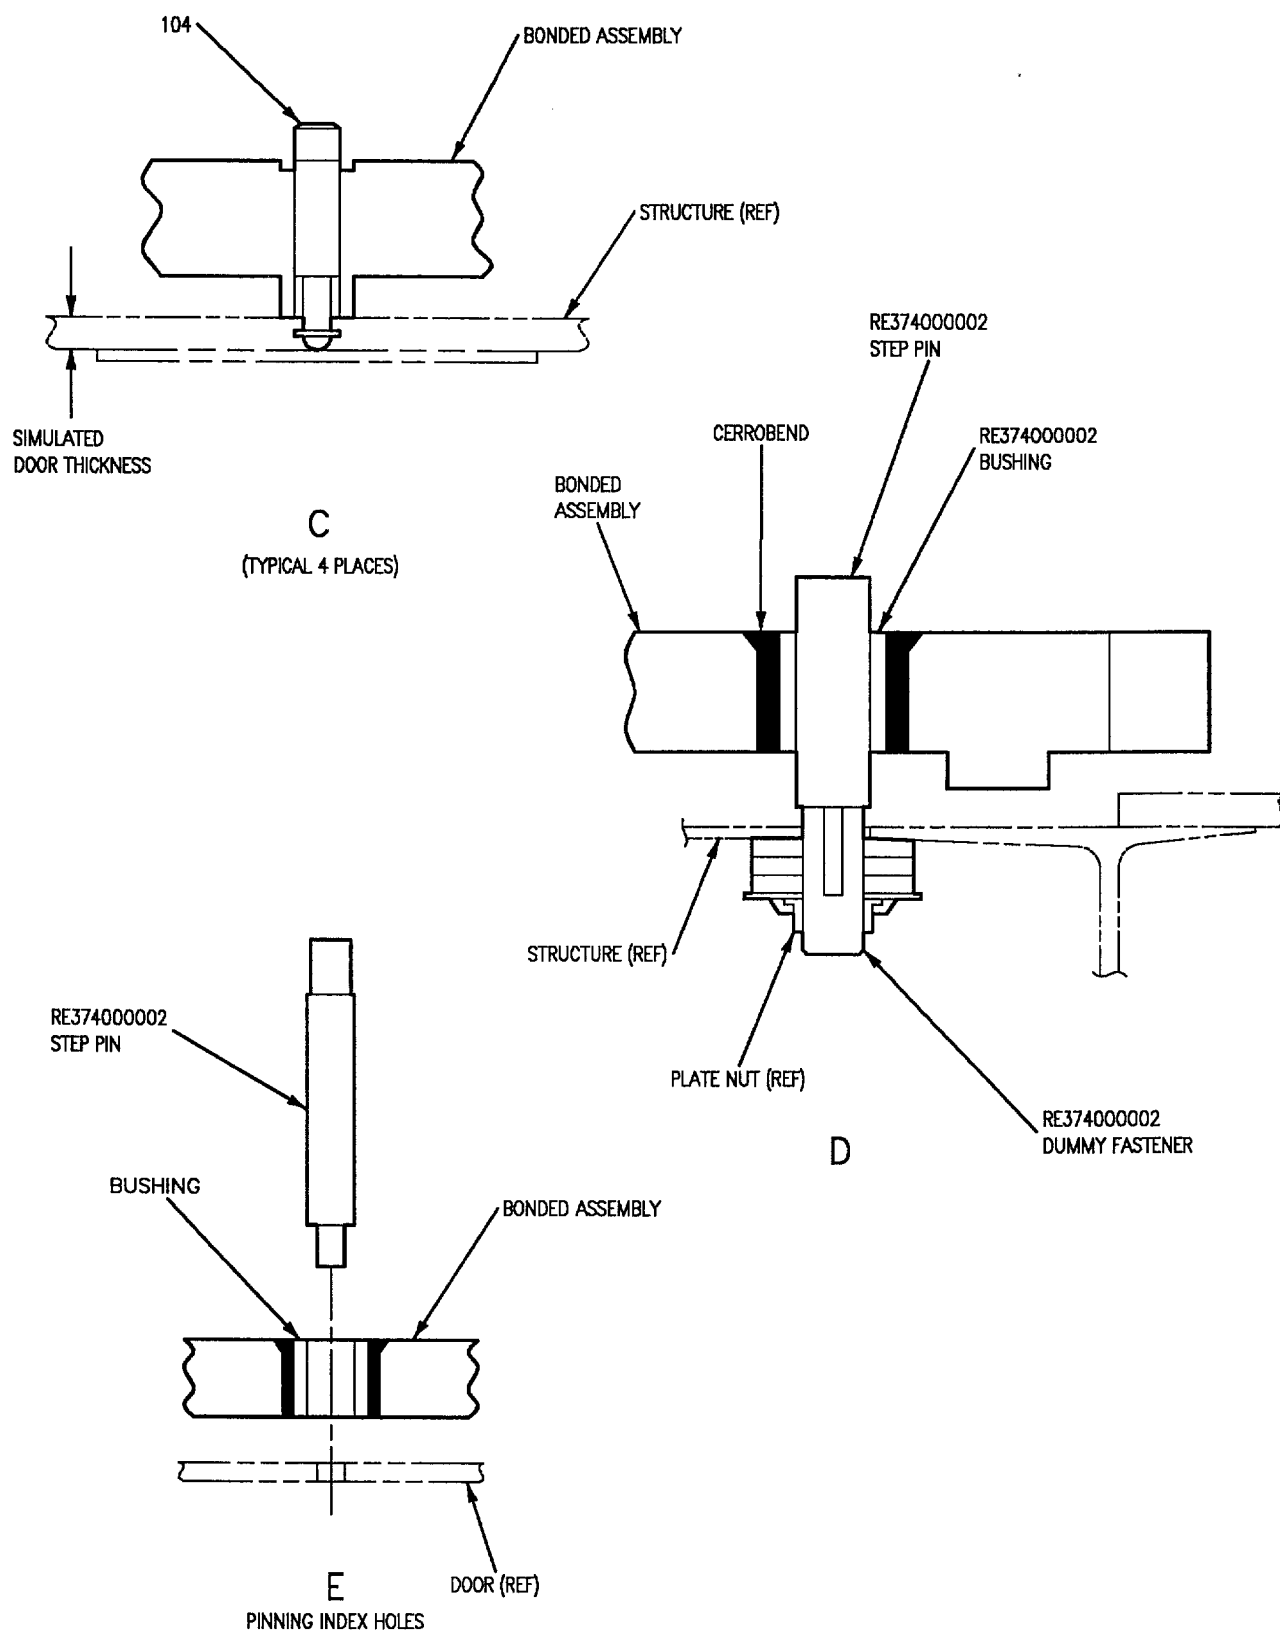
Installation of Plate Set for Drilling Door 83 (Sheet 1)
